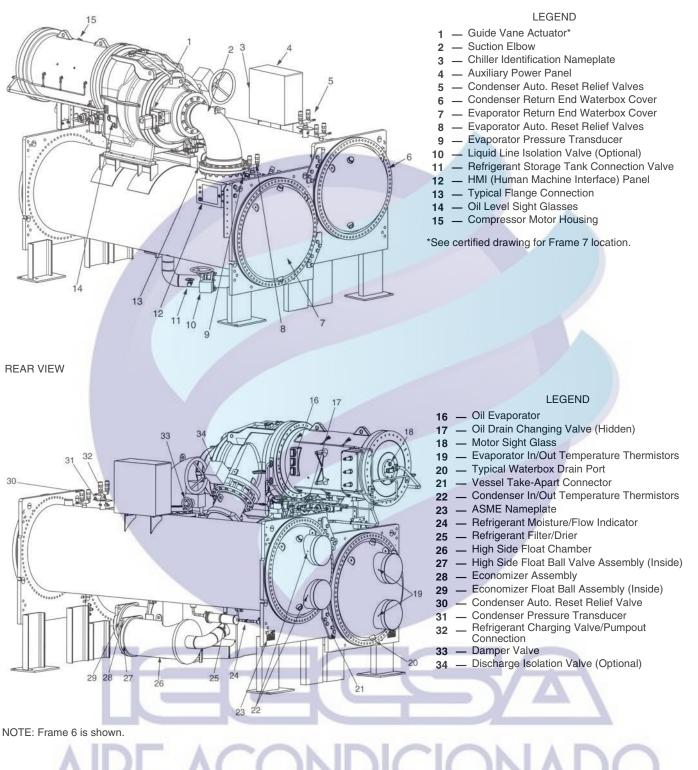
19XR Two-Stage Compressor Frame Sizes 6 and 7
